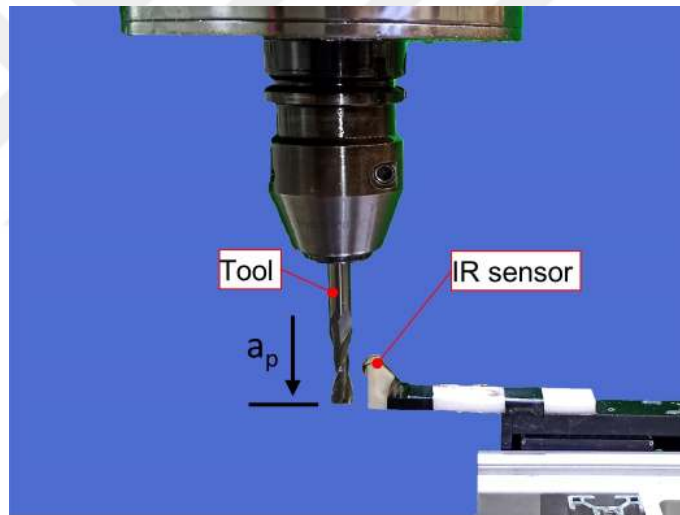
Tool wear detection hardware setup consisting of an IR sensor and endmill tool.
